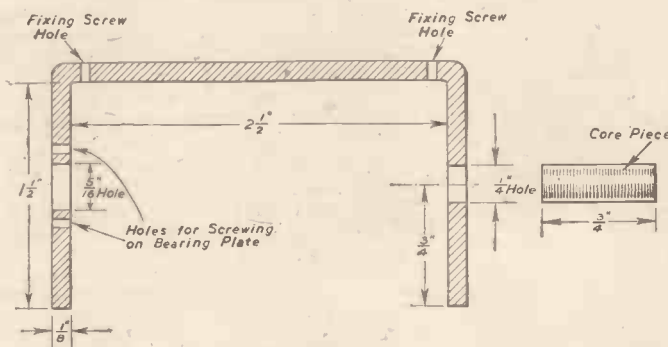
Section showing dimensions and arrangement of pole- and core-piece.
